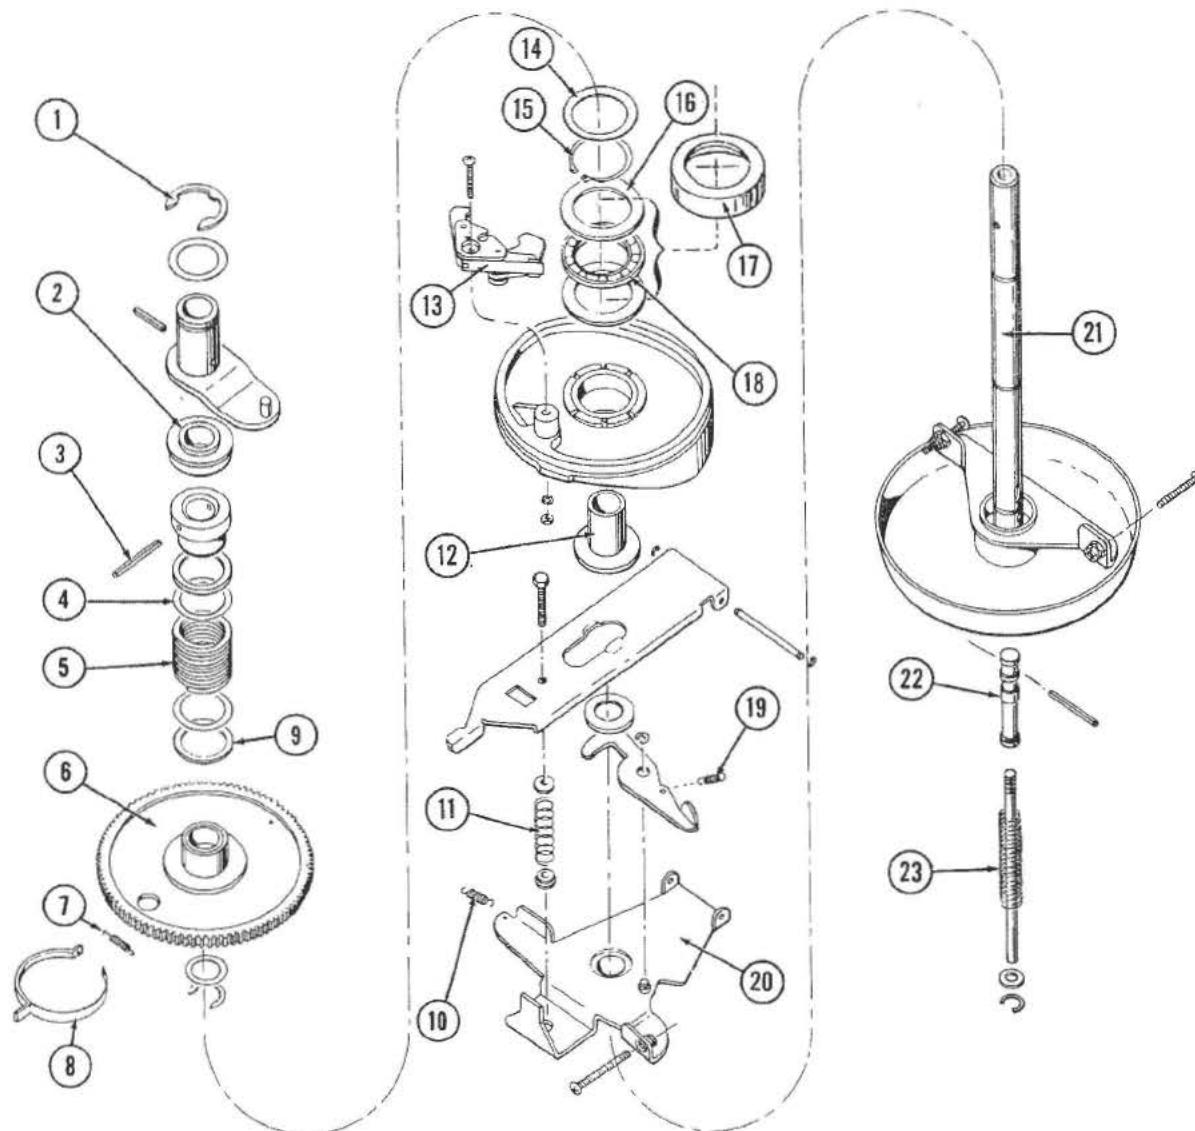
SELECTOR SHAFT ASSEMBLY AND MAIN CAM
